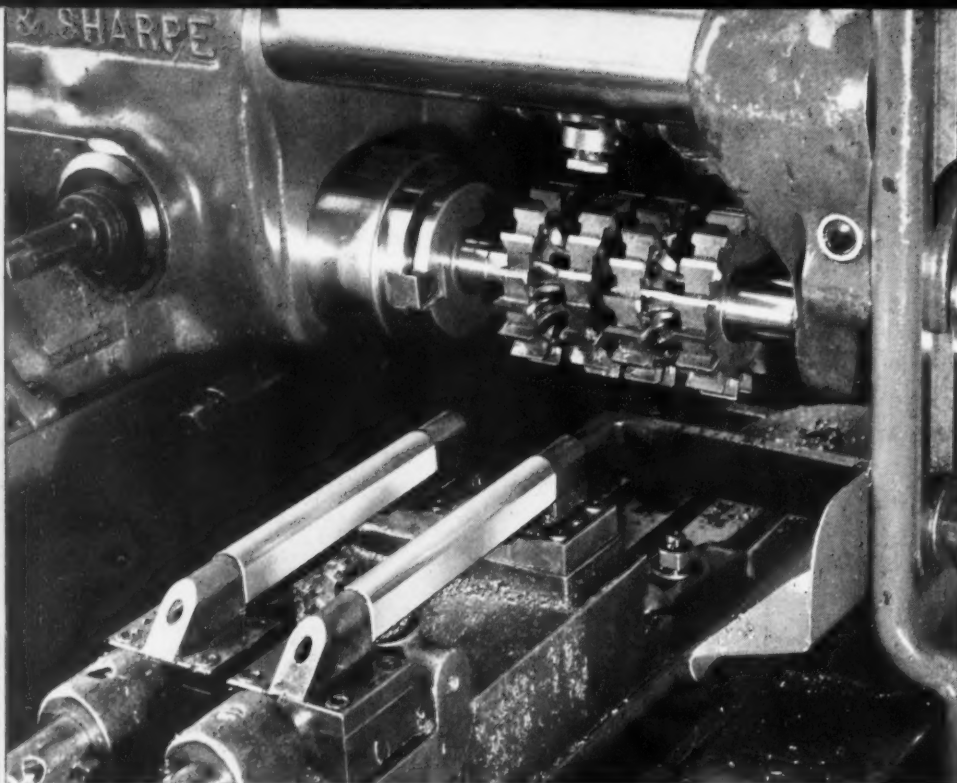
Milling out a Recess in the Rear of the Receiver for the Grip Safety. This Cut is Taken well up Inside the Hammer Guard. A Receiver with Finished Recess is Shown at the Front of the Machine
